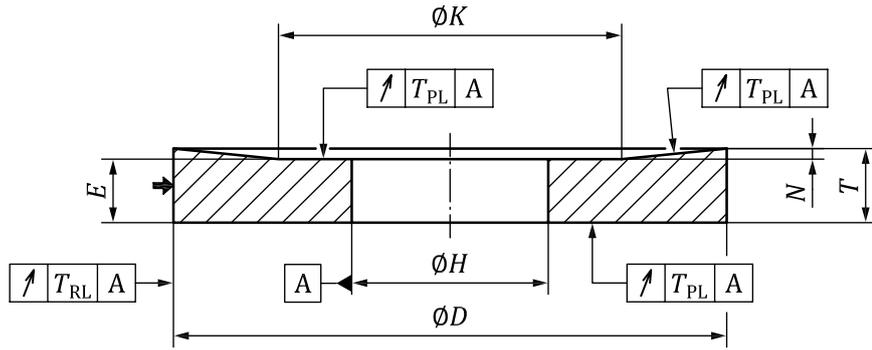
Grinding wheel, relieved on one side (Type 20)
